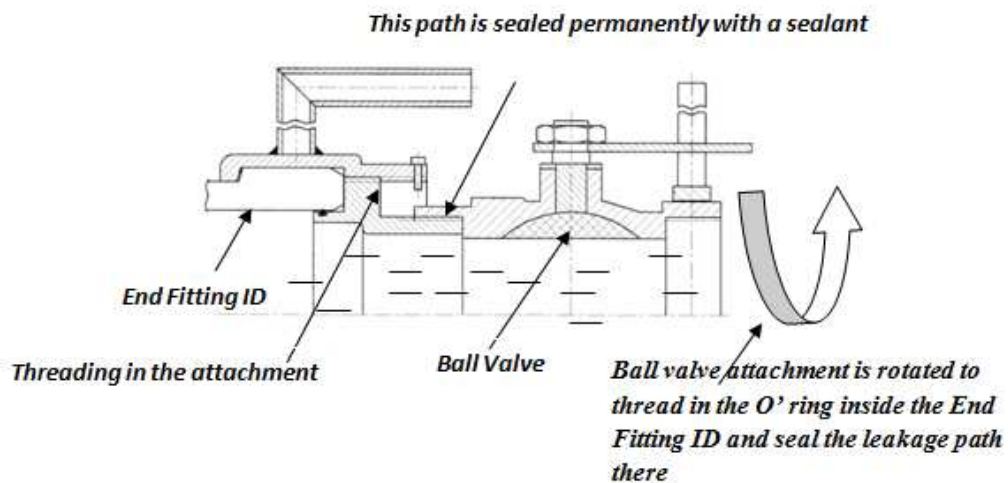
O' ring enters inside the End Fitting ID, components butt with E-face
